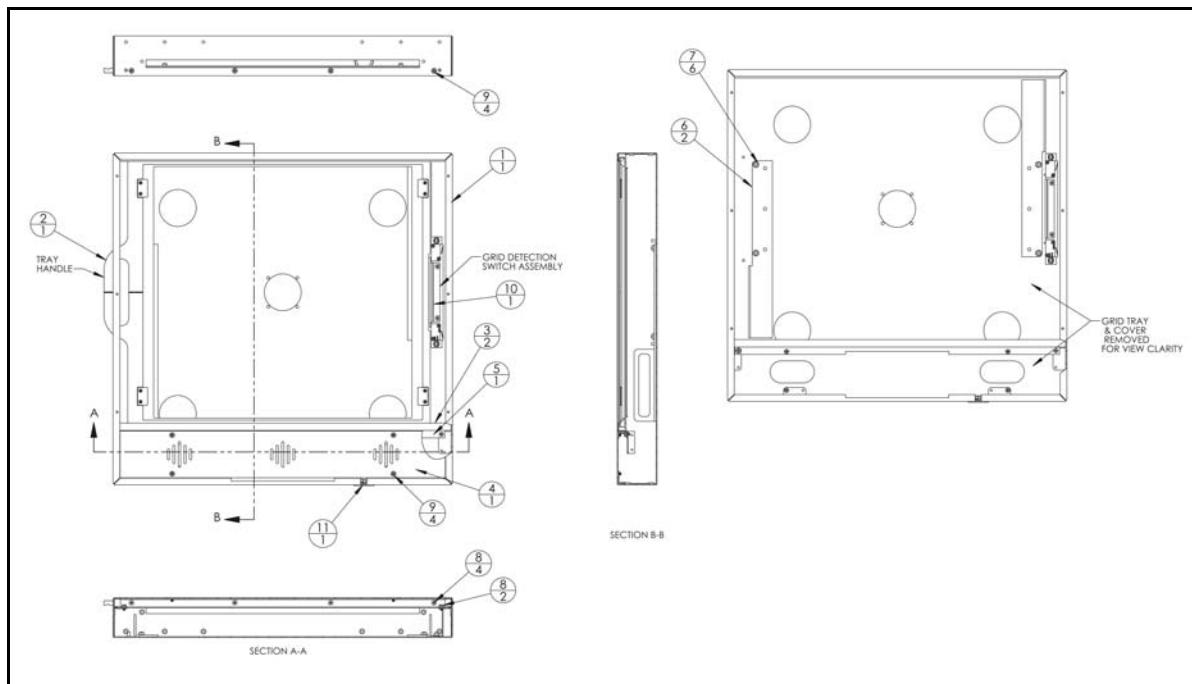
Varian Panel Cabinet Assembly (112-5504G1)
